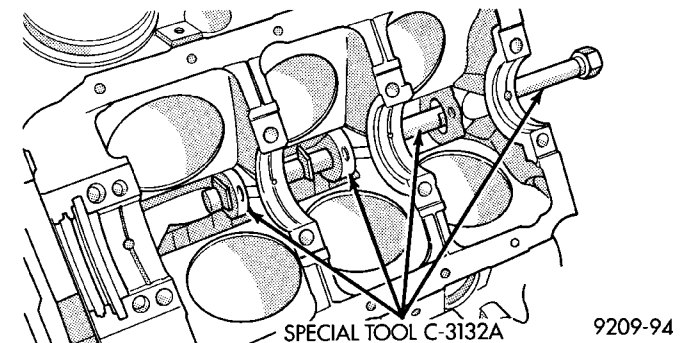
Removed Installation of Camshaft Bearings with Tool C-3132-A—Typical
